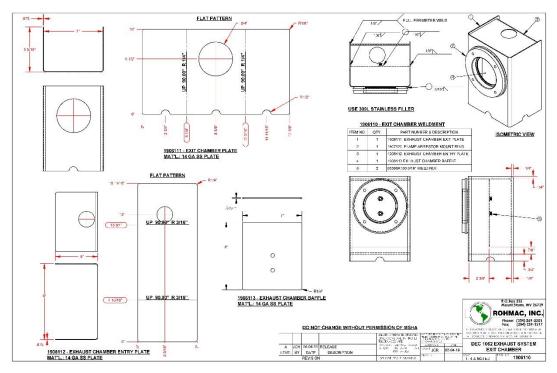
Revised Diesel Power Package Exhaust Exit Chamber Drawing
